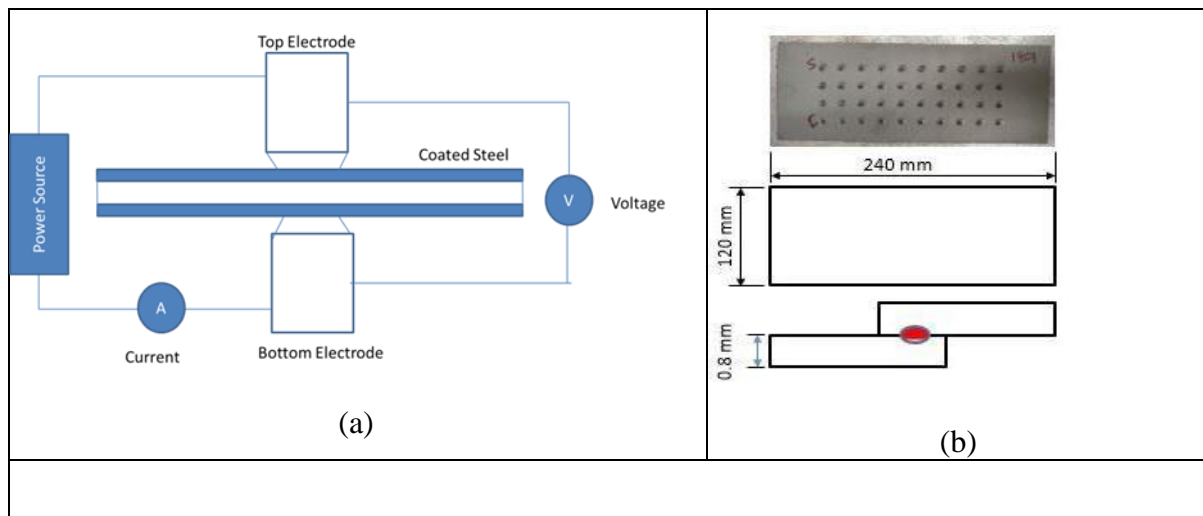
Schematic description of static contact resistance measurement setup and (b) design of specimen used for continuous welding study
